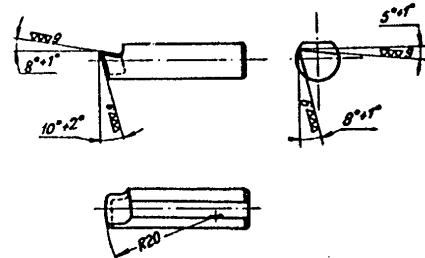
CUTTING TOOL GUIDE FOR BORING SICKLEATED ROD CRANKPIN END BUSHINGS
